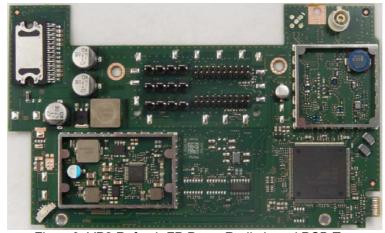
VP2 Refresh FP PowerRadio board PCB Top
